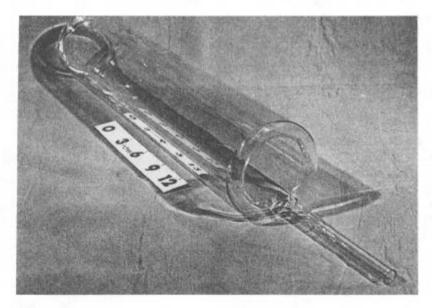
Glass mold to produce tube hollows of P/M 718 and 625 via CAP technology.
